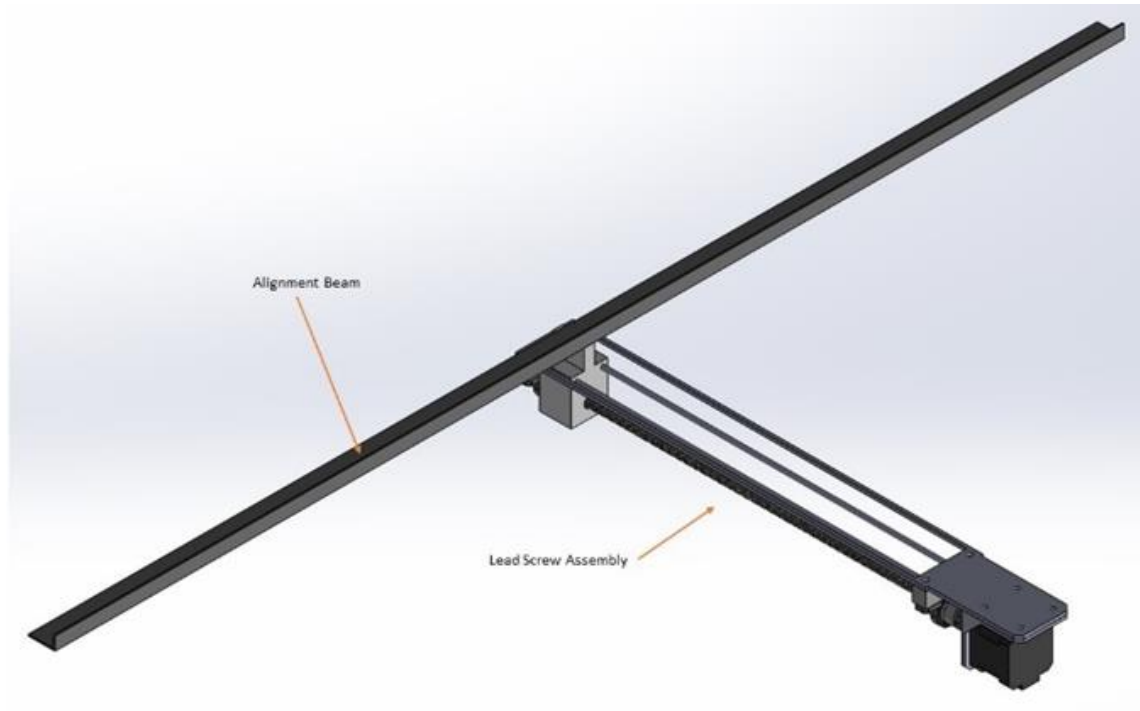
Alignment Mechanism (Lead Screw Assembly + Alignment Beam)
